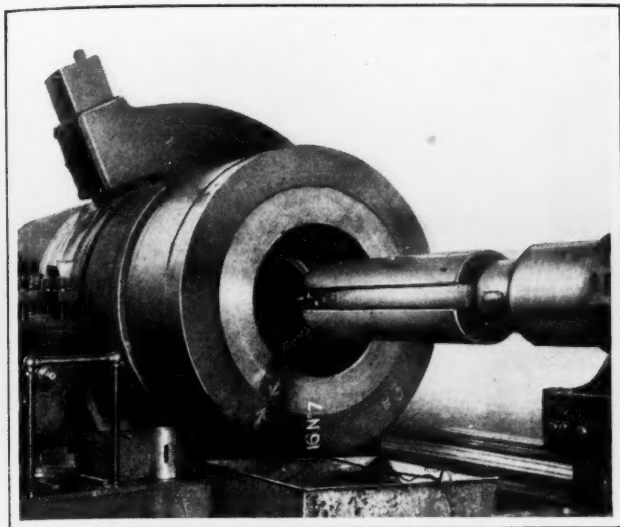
Tool Employed in Finish-boring One of the Cylindrical Zones of the Main Tube
